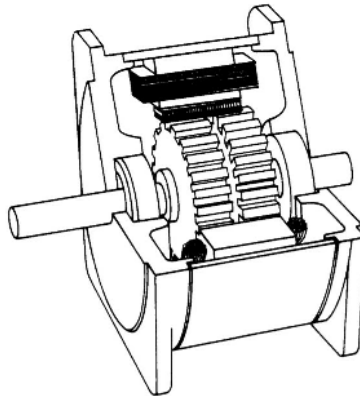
Sectional drawing of a stepper motor; at the center is visible the toothed rotor.
